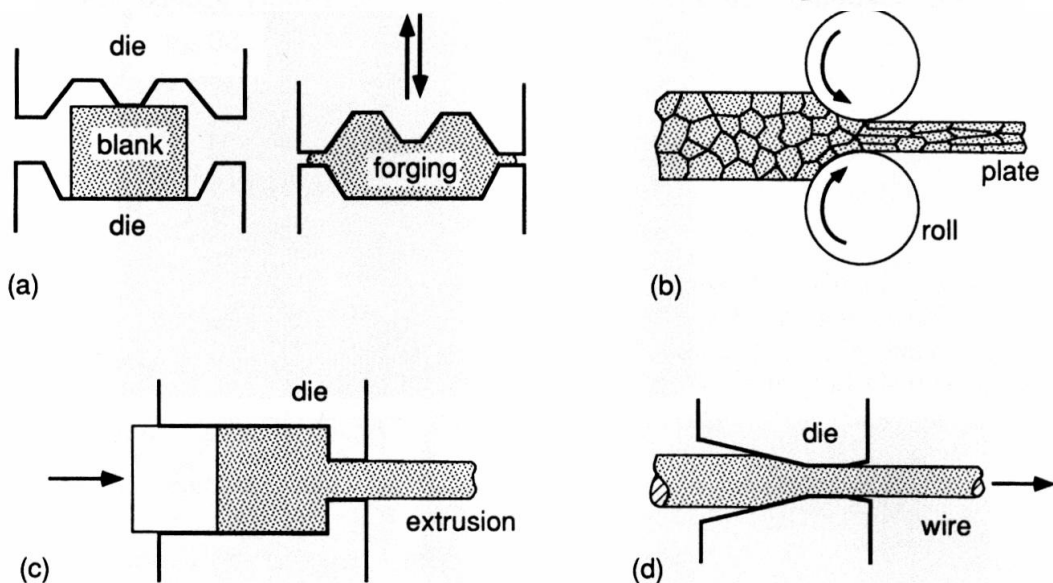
Some methods of forming metals into useful shapes: (a) forging employs compression or hammering; other methods include (b) rolling, (c) extrusion, and (d) drawing.
